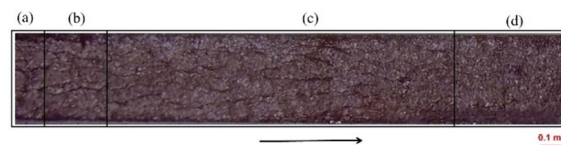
Fracture surfaces under mixed-mode ($R=0.1$, $\alpha=45^\circ$): a prefabricated crack stage, b initial crack deflection stage, c crack deflection stage, d end stage of crack deflection
